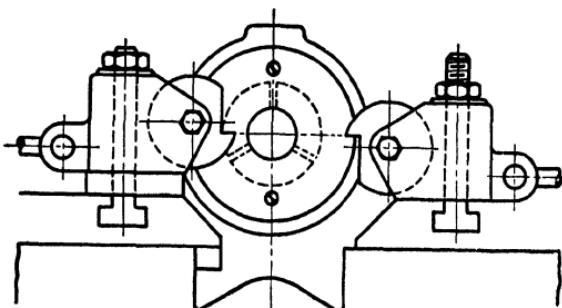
Formed circular cutters and circular cutoff tools are used on rod machines.
